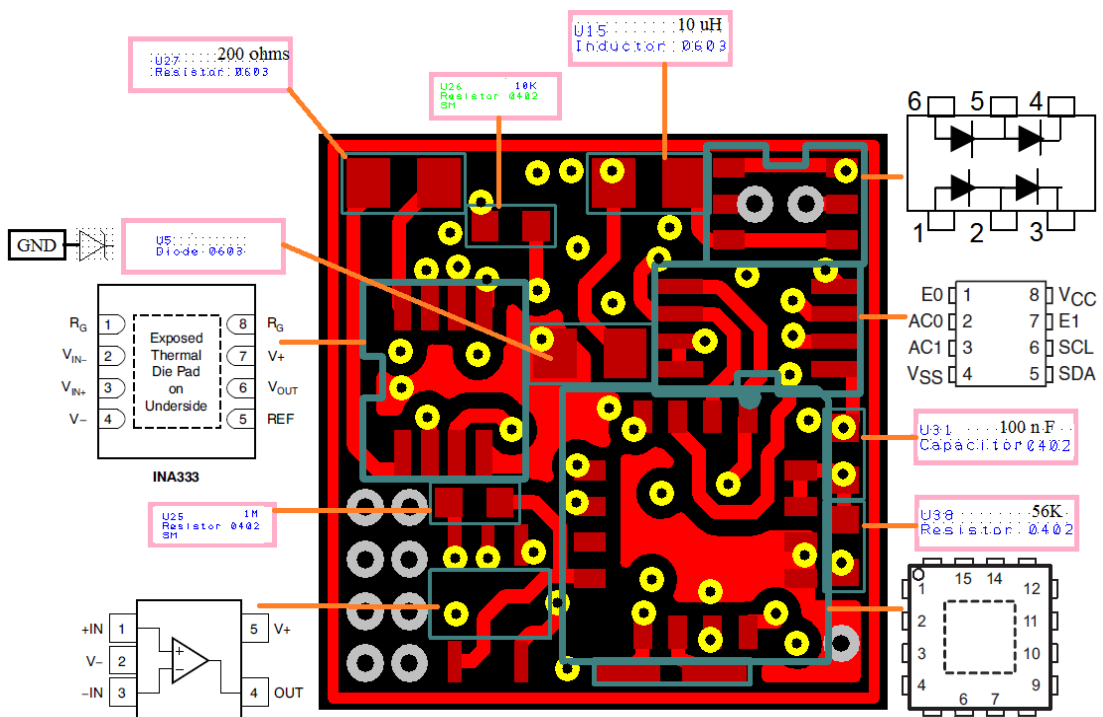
Components placed in the Top Layer PCB Layout of the four channeled telemetry unit of dimension 10 mm x 10 mm
